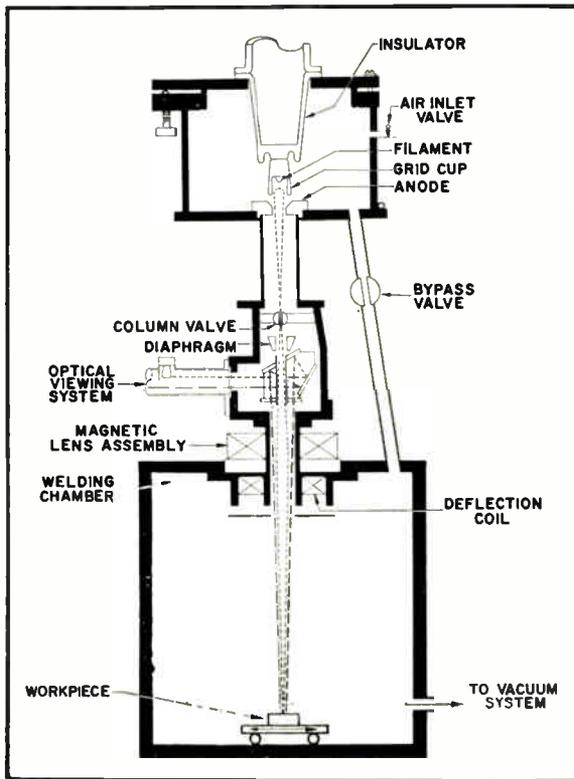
Hamilton-Zeiss electron beam welding system welds by producing an electron beam space charge, accelerating the electrons and then focusing the electron beam on a workpiece.
